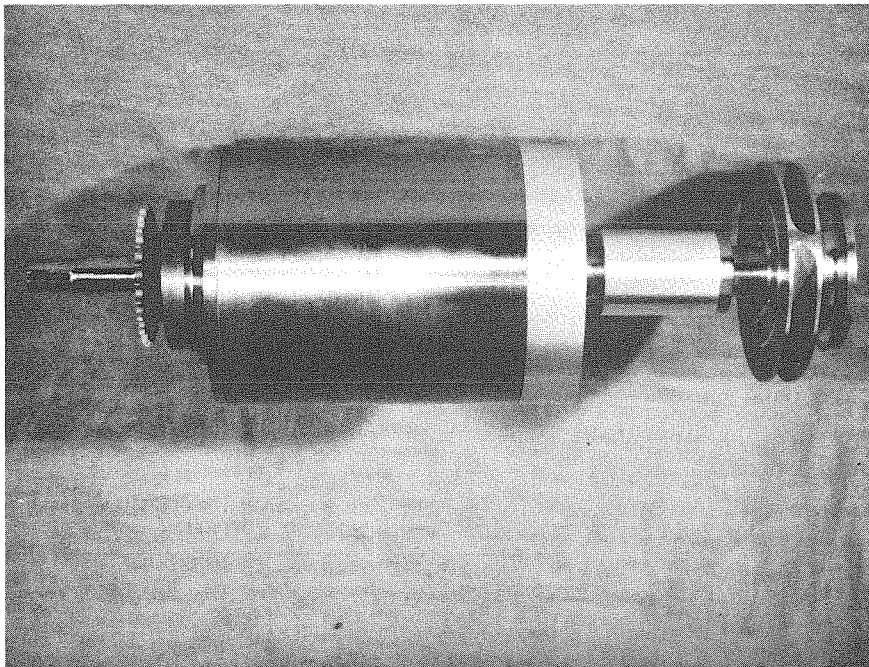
The eccentric drive disassembled from the Rotor Force Test Facility. Impeller X can be seen mounted at the end of the drive shaft.
